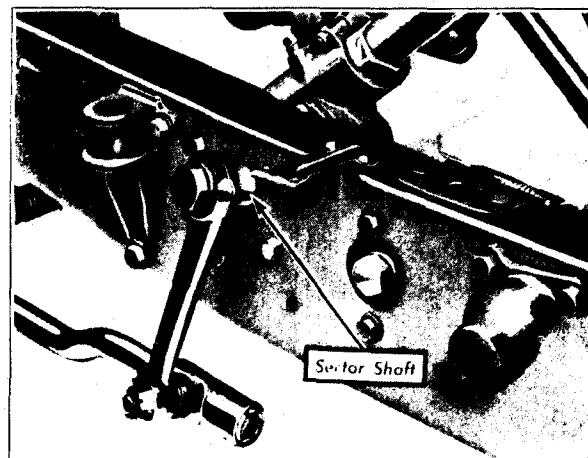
The 355 steering gear sector shaft is tipped upward at the outer end.
